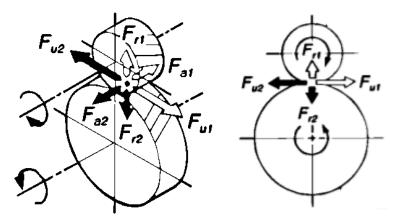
On left: The interface between two helical gears and the components of force imposed between them. On right: The interface between two spur gears and the components of force imposed between them. As explained above the spur gears have no thrust force acting on them [5].
